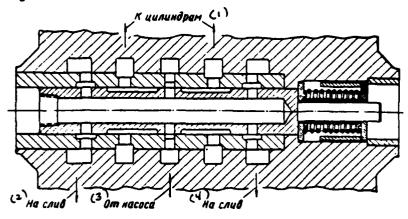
The schematic of valve with pressfitted into the housing bushing.
